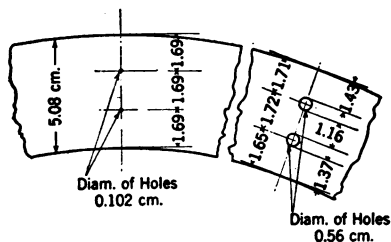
SHOWING POSITIONS OF HOLES FOR BELT WINDINGS
